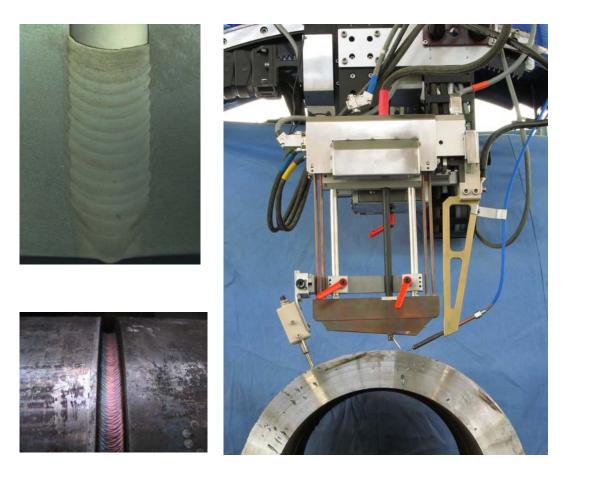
Narrow gap TIG hot wire welding. Torch with oscillating electrode and wire for wall thickness from 80 to 160 mm.
